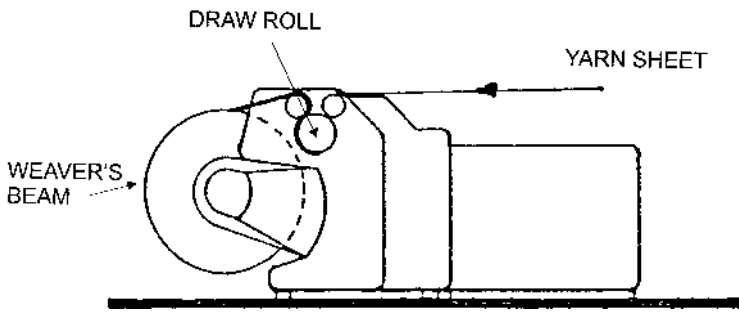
Side view of a typical head stock. (From Ref. 11.)
